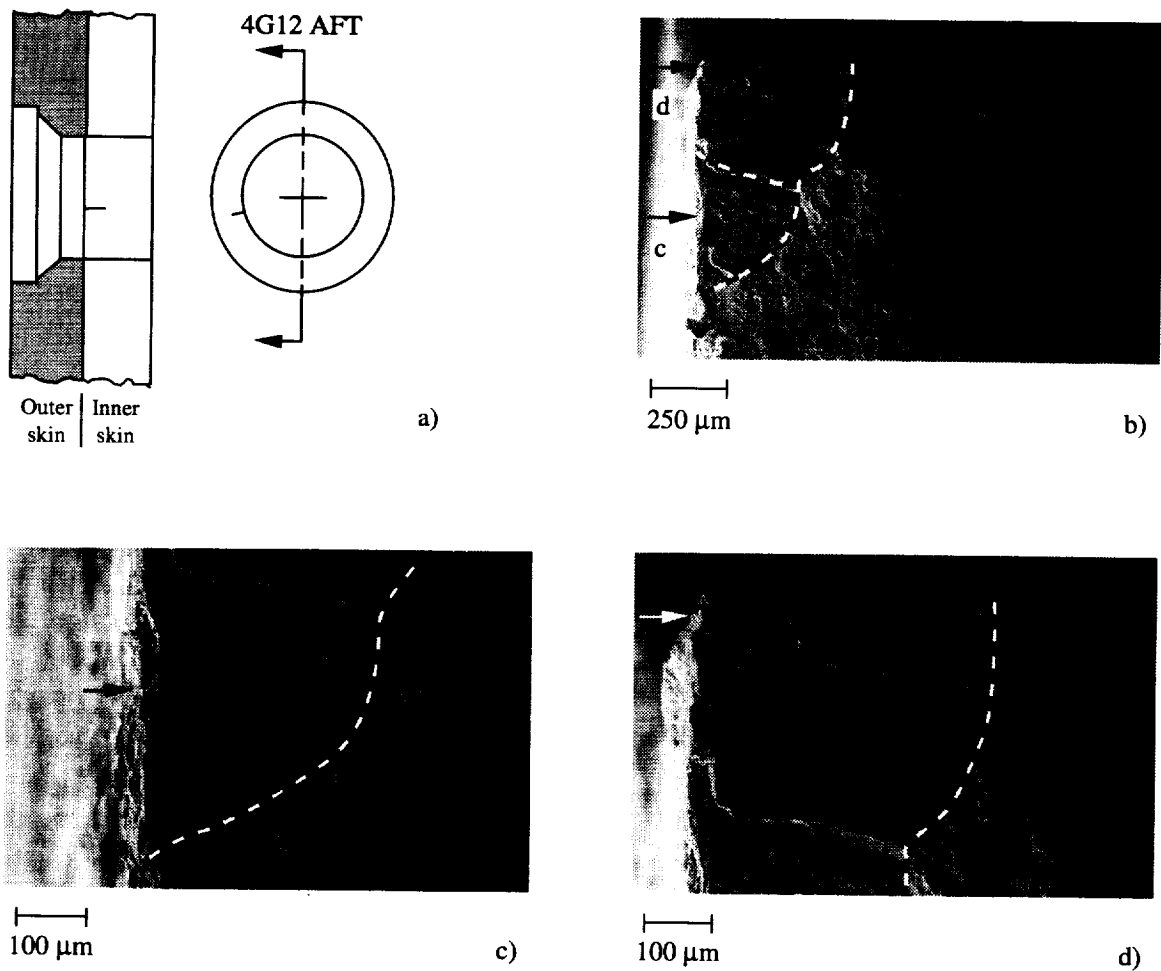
a) The schematic shows the rivet hole 4G12 configuration and the location of the inner skin fatigue crack oriented in the aft direction and below the 9 o'clock position. b) The SEM micrograph shows the fatigue crack fracture surface located at the outboard corner of the inner skin rivet hole. The arrows mark likely sites of crack initiation along the faying surface. The irregular shape of the fatigue crack front marked by the dashed lines suggests that two fatigue cracks coalesced at the fracture surface ridge (horizontal dashed line). c) The SEM micrograph shows the fatigue crack, region "c" in Figure 11.45.b, at high magnification. The arrow marks the crack initiation site and the dashed line marks the fatigue crack front. d) The SEM micrograph shows the fatigue crack region "d" in Figure 11.45.b at high magnification. The arrow marks the crack initiation site and the dashed line marks the fatigue crack front.
